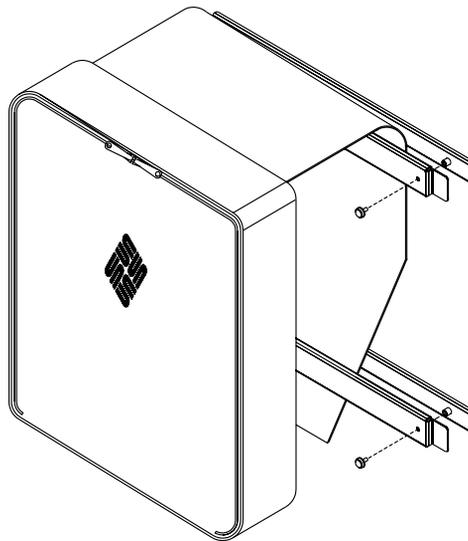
Assembling the Document Bag and Mounting Brackets
